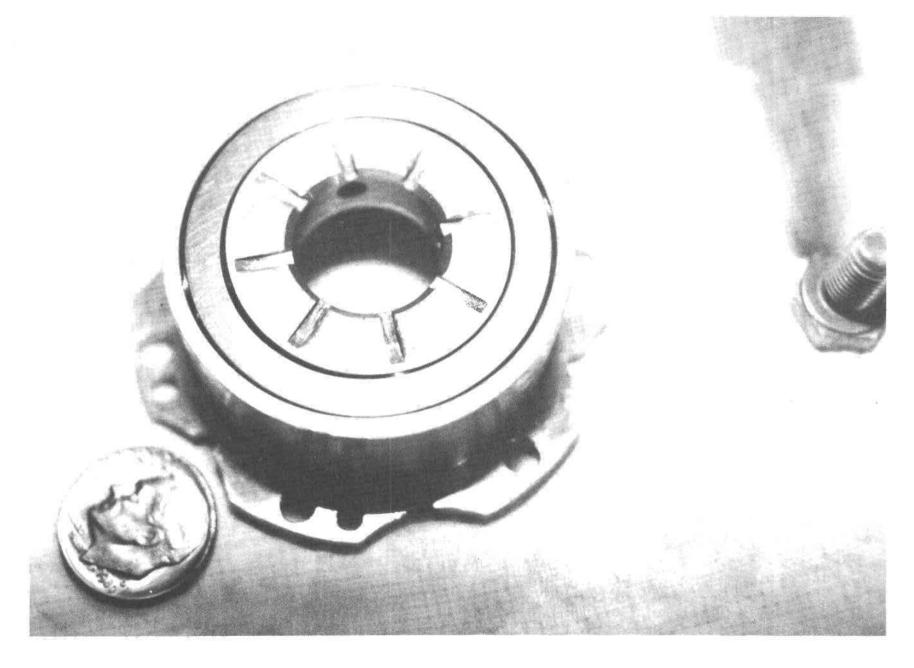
Original Design (Barber-Nichols) of a Gimbal-Mounted Flat Pad Thermal Wedge (Fogg) Thrust Bearing
